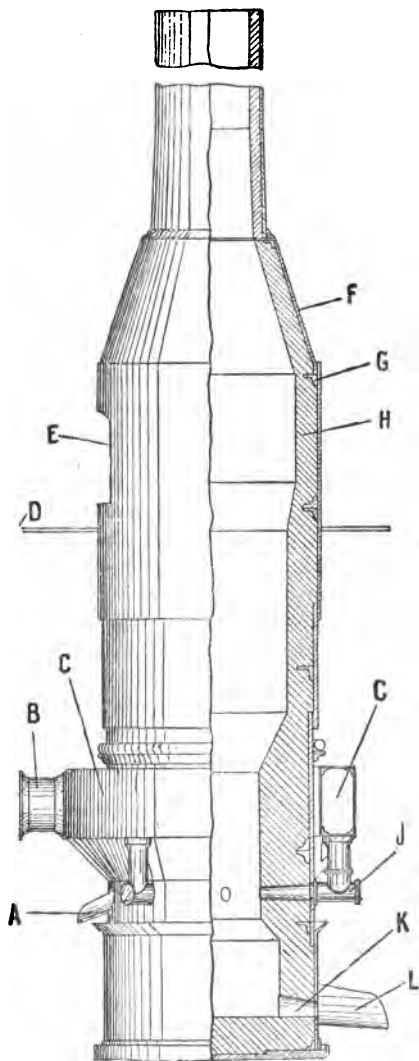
Steel Work Cupola—Half Elevation, Half Section.
